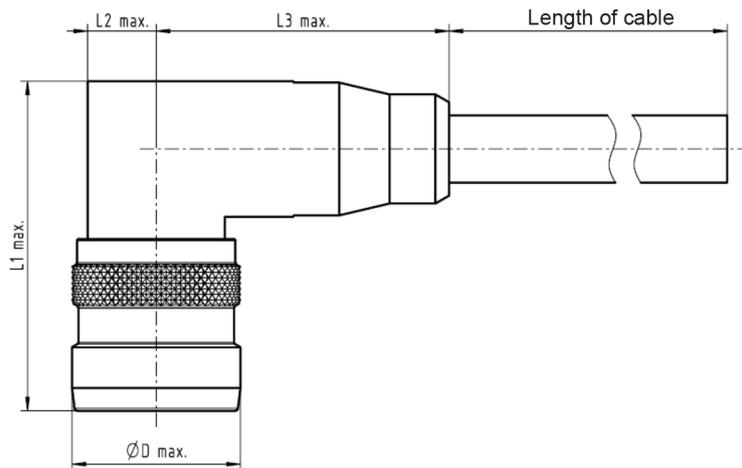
Non-rewireable connector, male contacts, angled version, with outer push-pull locking
